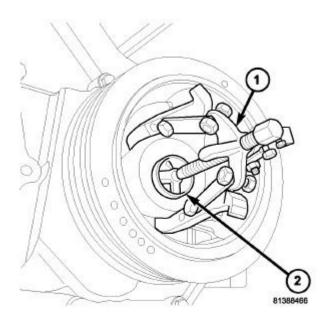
CRANKSHAFT DAMPER REMOVAL Courtesy of CHRYSLER LLC
